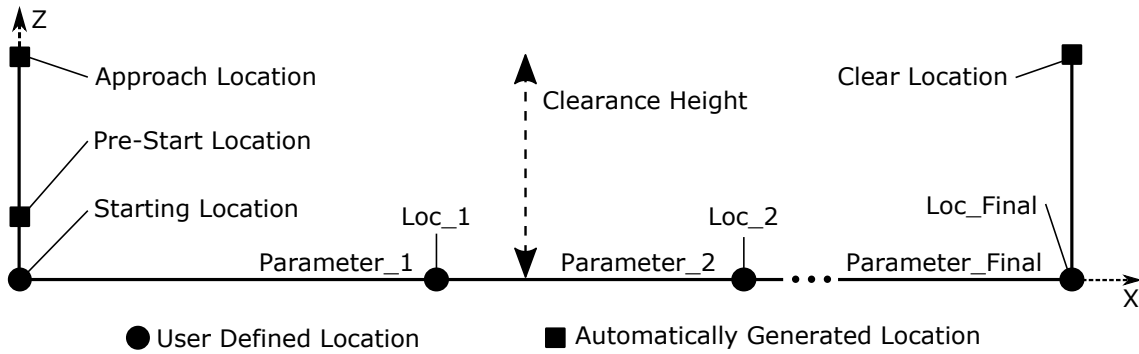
Weld path structure (Add\_Weld(...))
